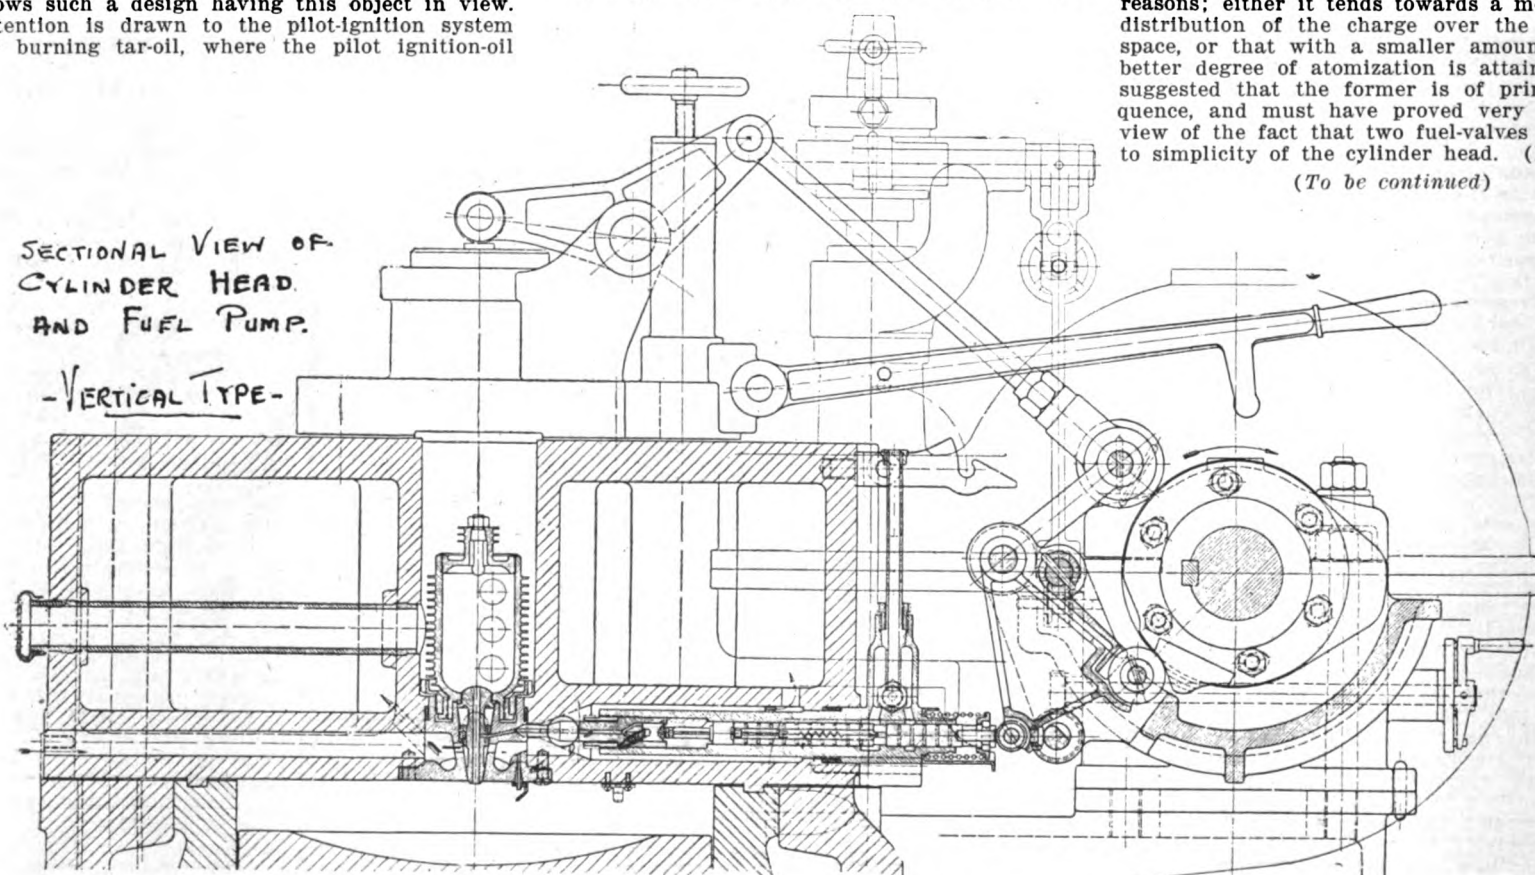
Sectional view of Steinbecker cylinder-head and fuel-pump. Another drawing is given elsewhere in this issue
